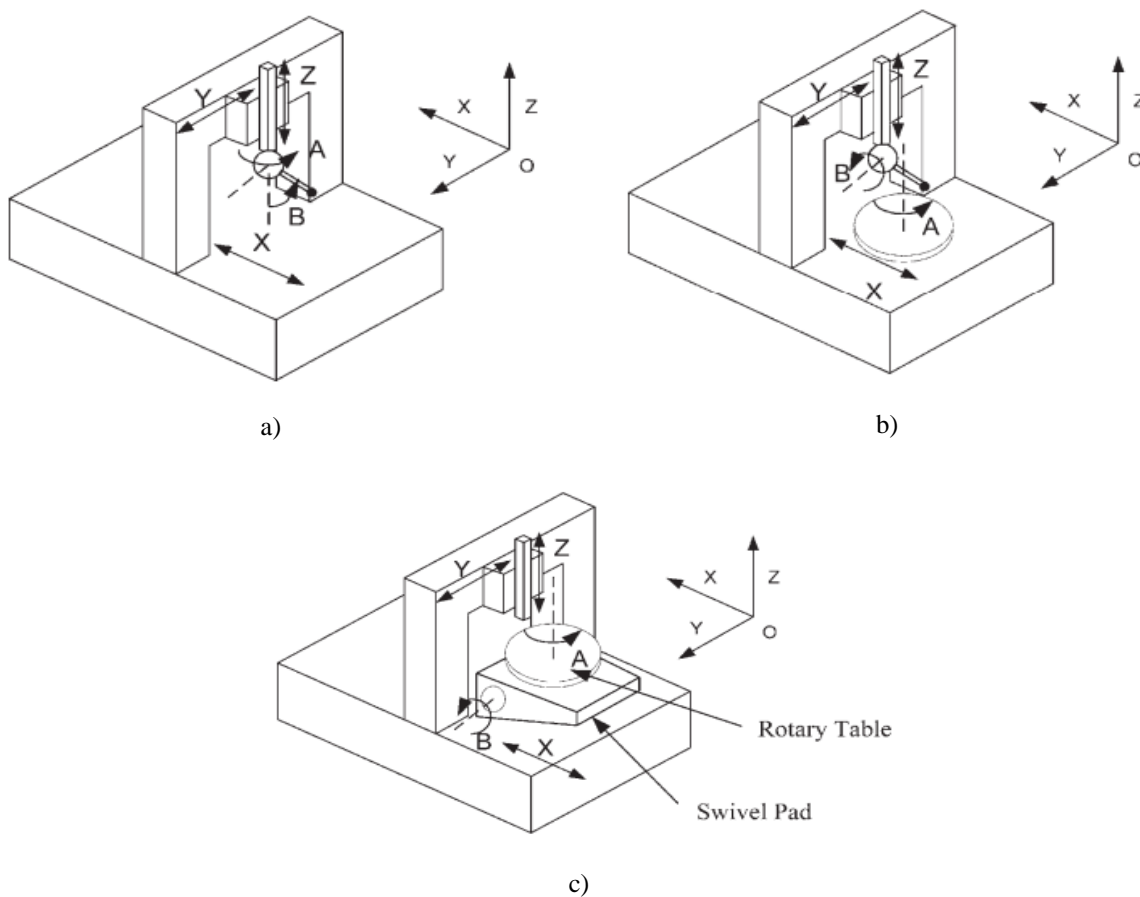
Layout for TTTRR a), RTTTR b), RRTTT c) machine type [16].
